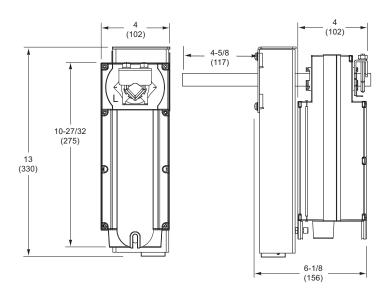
Mx41-6343 Actuator/Linkage Assembly With AV-609-1 Linkage.
